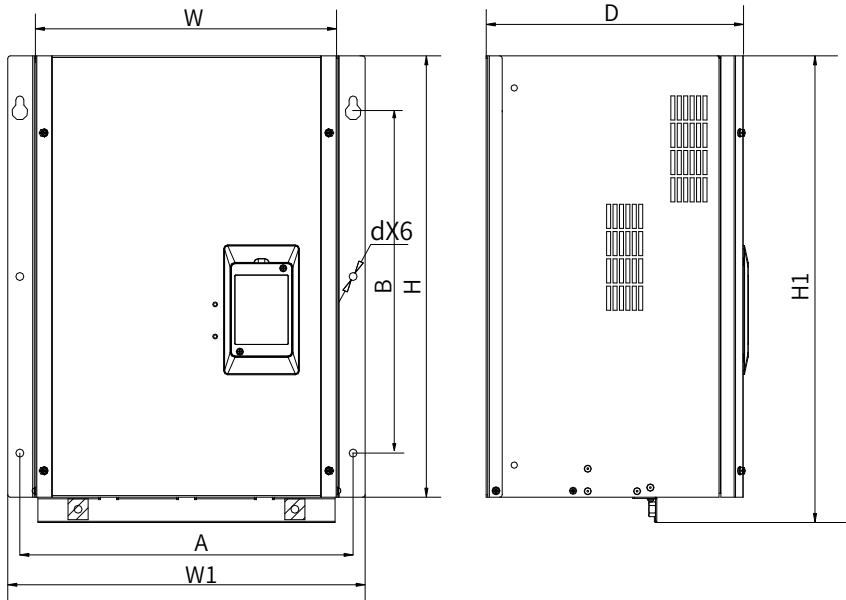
Appearance and dimensions of the CA300C AC drive (75-160 kW)
